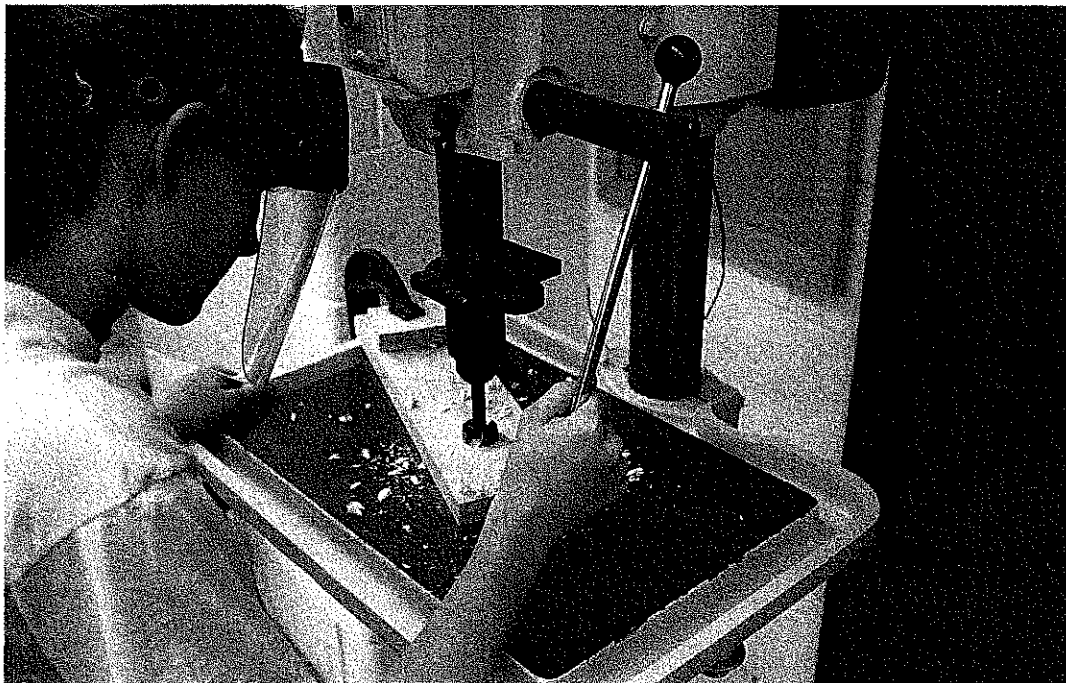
Drill press safety. The stock is securely clamped in place. The operator is wearing a face shield.
